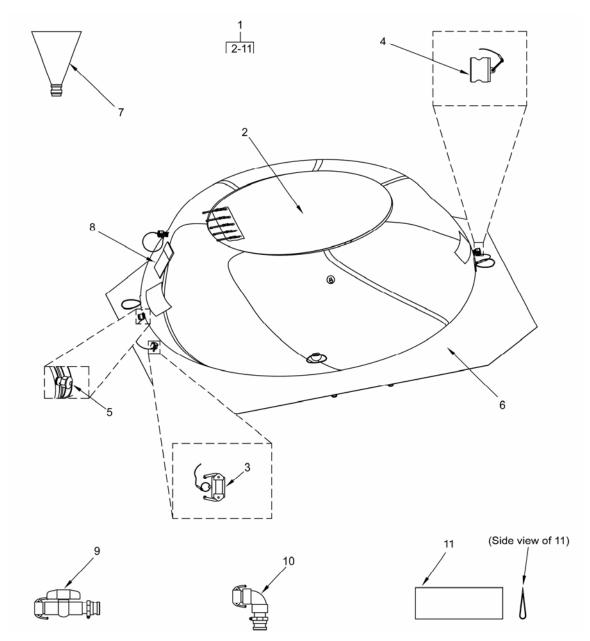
Tank, Fabric, Collapsible, Drinking Water.
